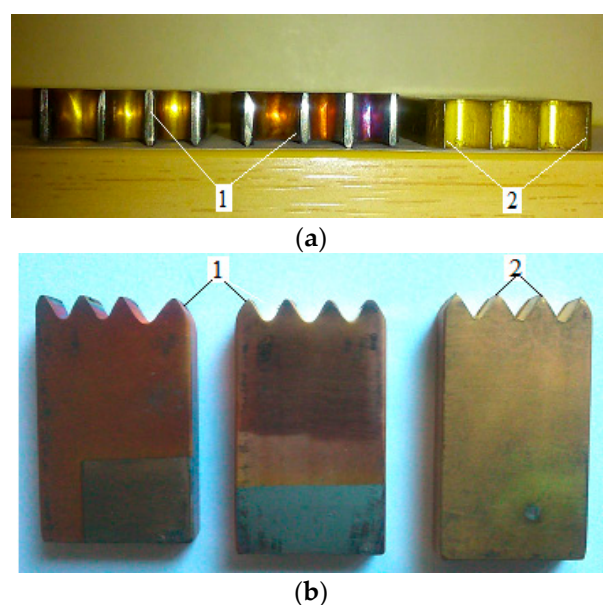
Plates: (a) view of the ends of the edges; (b) front view; 1—working edges (after testing); 2—original edges.
